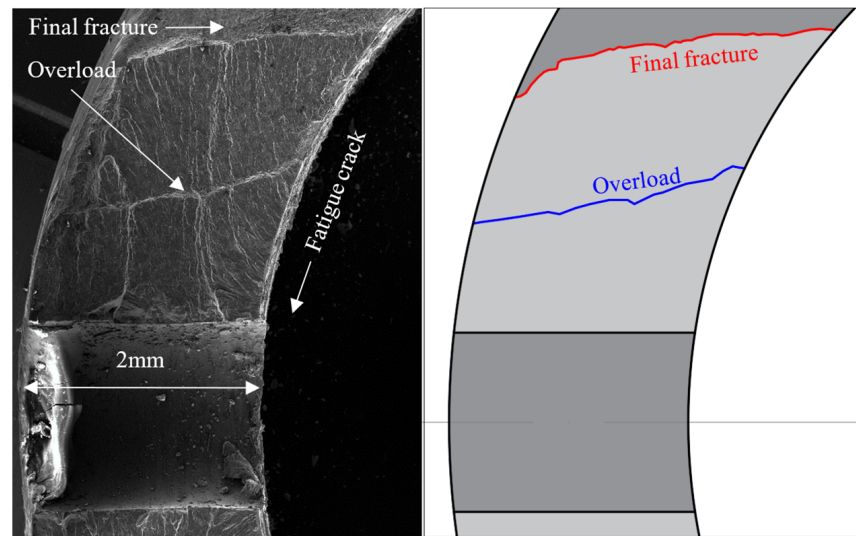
Fracture zone specimen with 2 mm wall thickness; blue overload crack, red final fracture.
